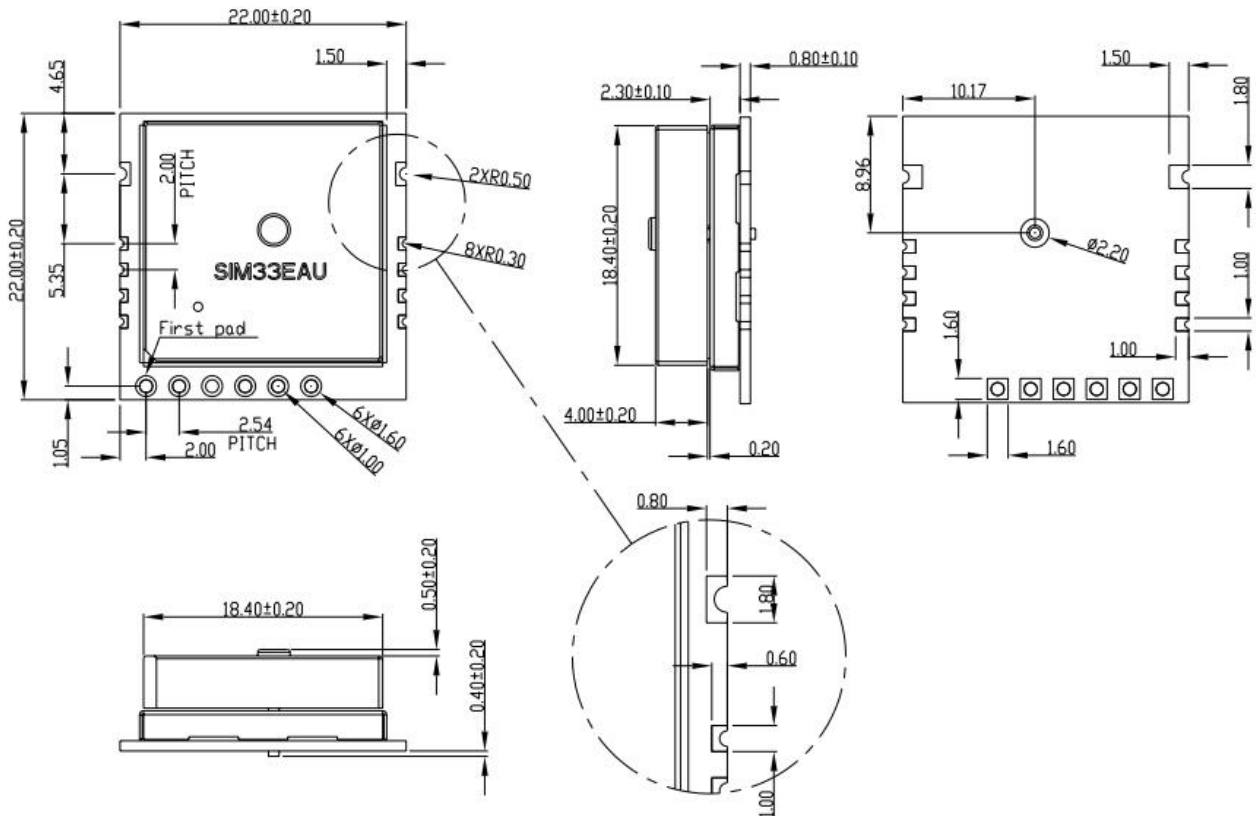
SIM33EAU mechanical dimensions (Unit: mm)
